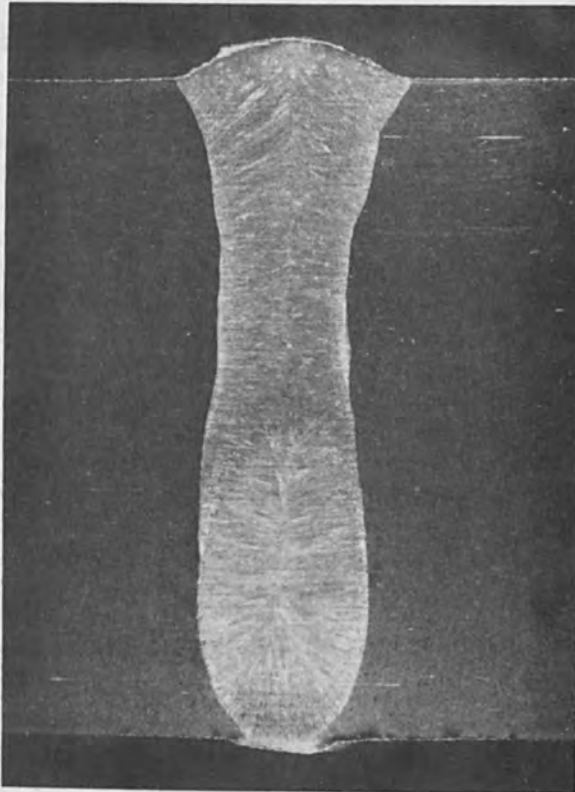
Nonvacuum Electron Beam Weld in Stainless Steel.
